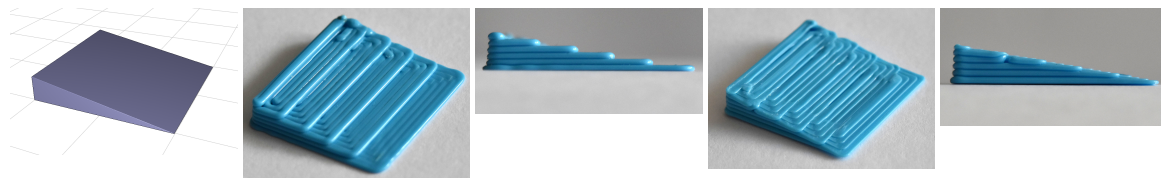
Printing a wedge model clearly reveals the staircase defects that plague 3D printing. (a) Input 3D model; the bottom edge length is 20mm and the angle of the incline plane is 10. (b) Global view and (c) side view of a standard, flat layer printed result. (d) Global view and (e) side view of our anti-aliased printed result, revealing the improvement in surface accuracy and silhouette smoothness
